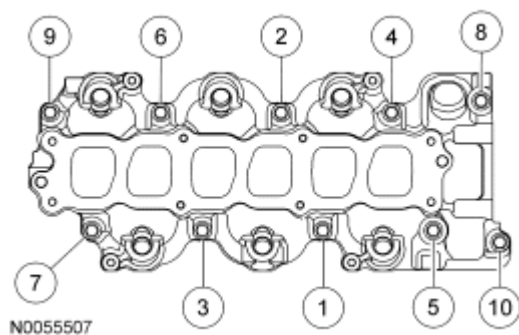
Installing Lower Intake Manifold Bolts In Sequence
